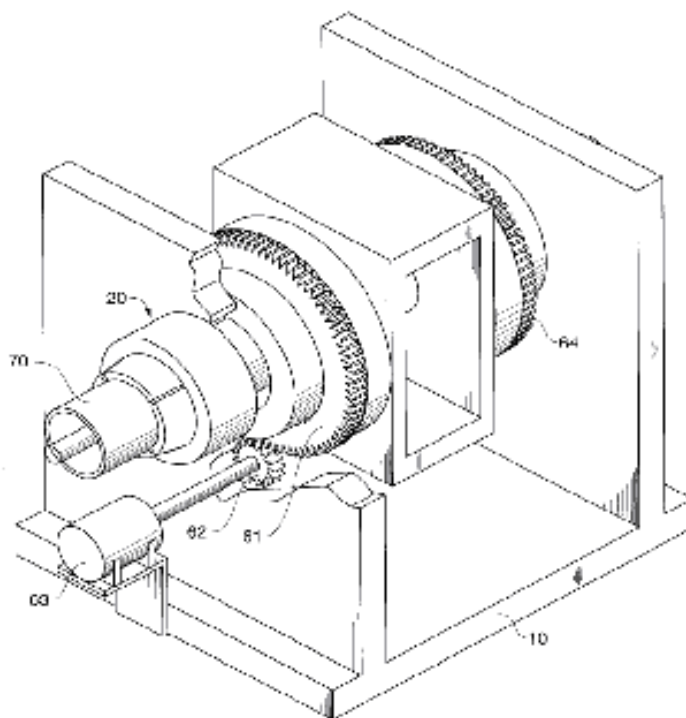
The orbital friction stir welding apparatus (NASA).
